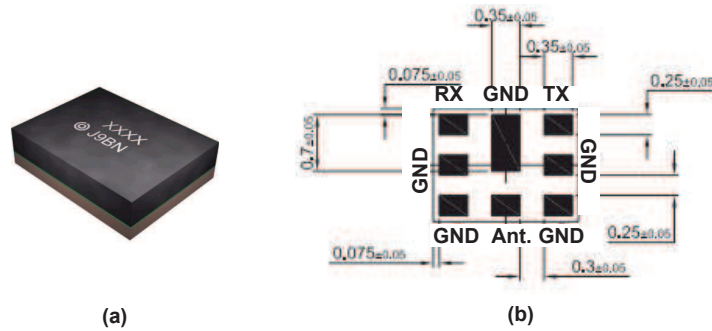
(a) SAW chip (b) a bottom view of the SAW layout [3].
